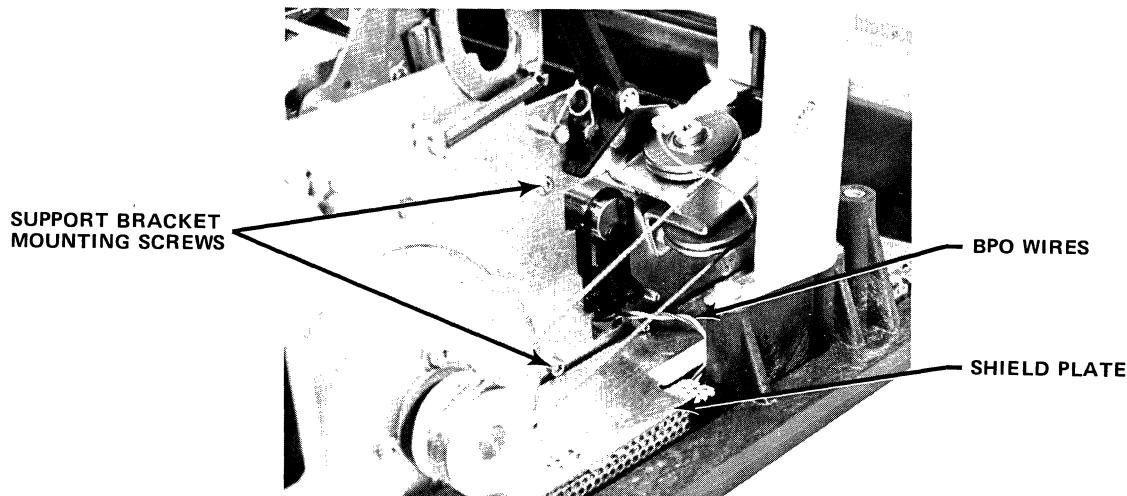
ROUTING OF THE BPO SWITCH WIRES
